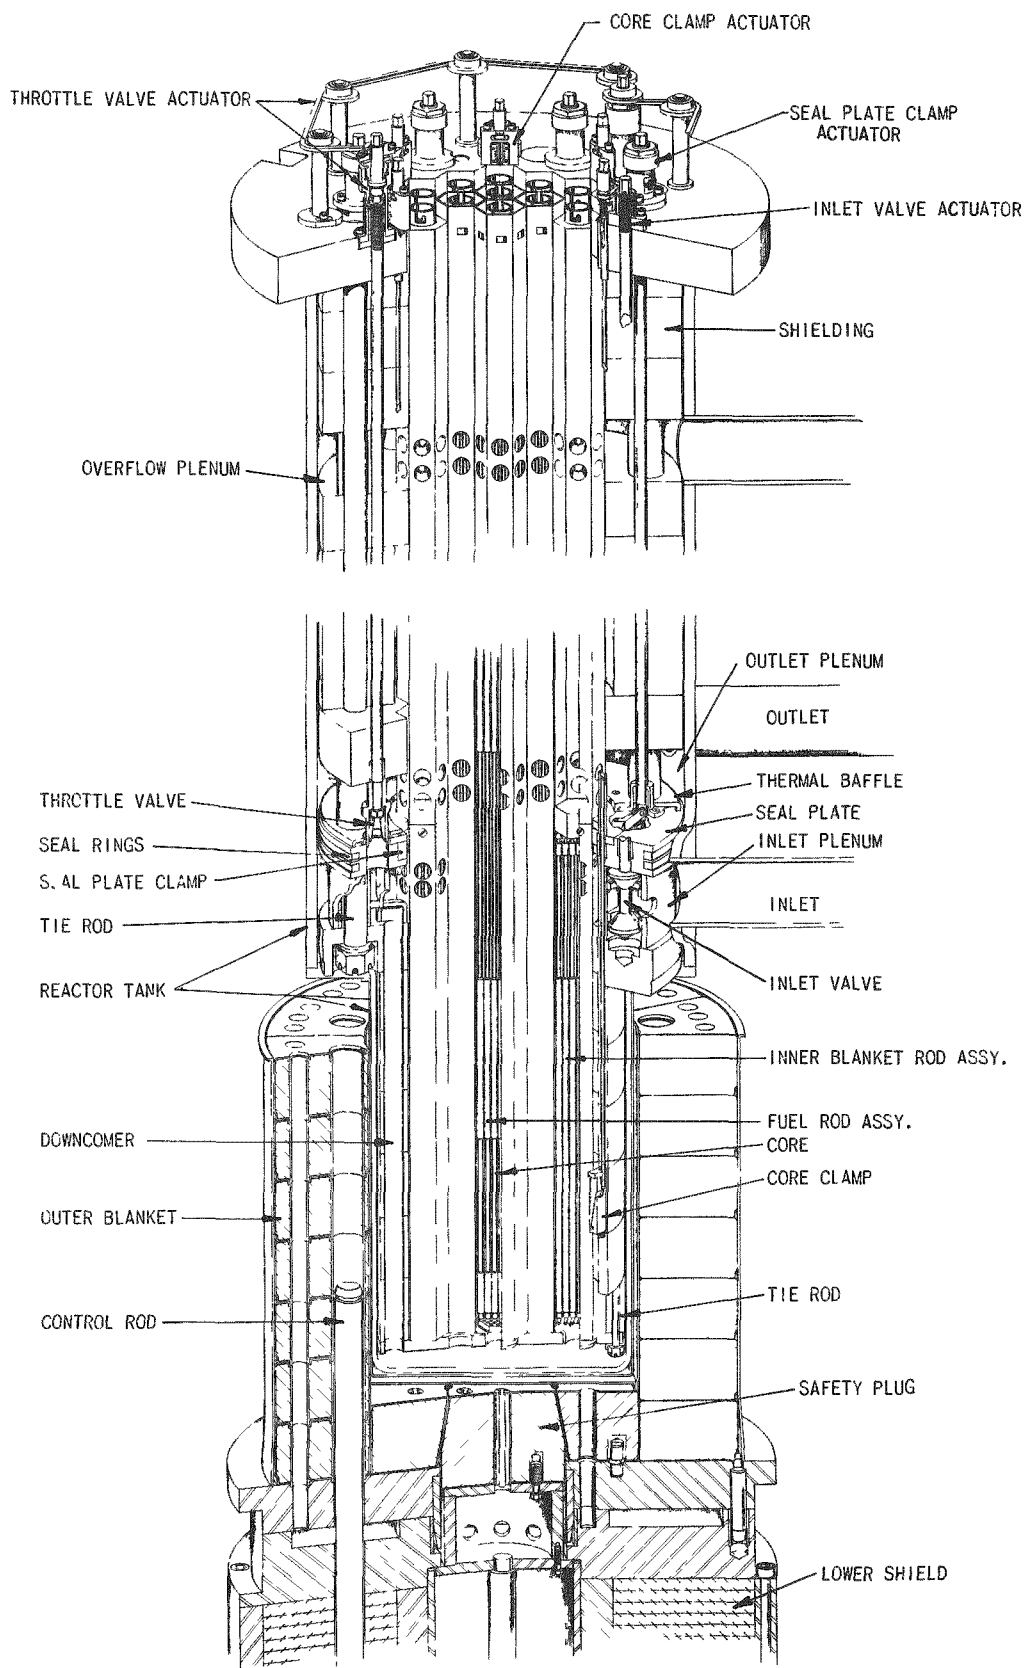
INNER TANK ASSEMBLY EBR I, MARK III
